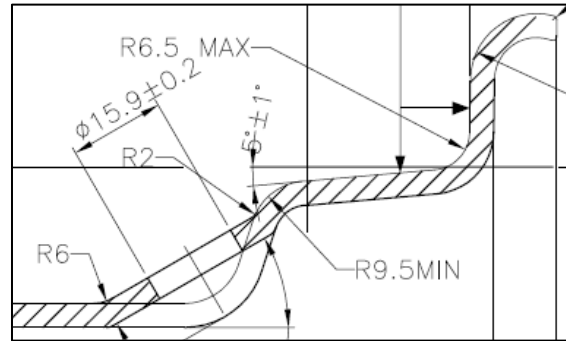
Valve Hole Depression Drawing [Courtesy to RIM Plant]
